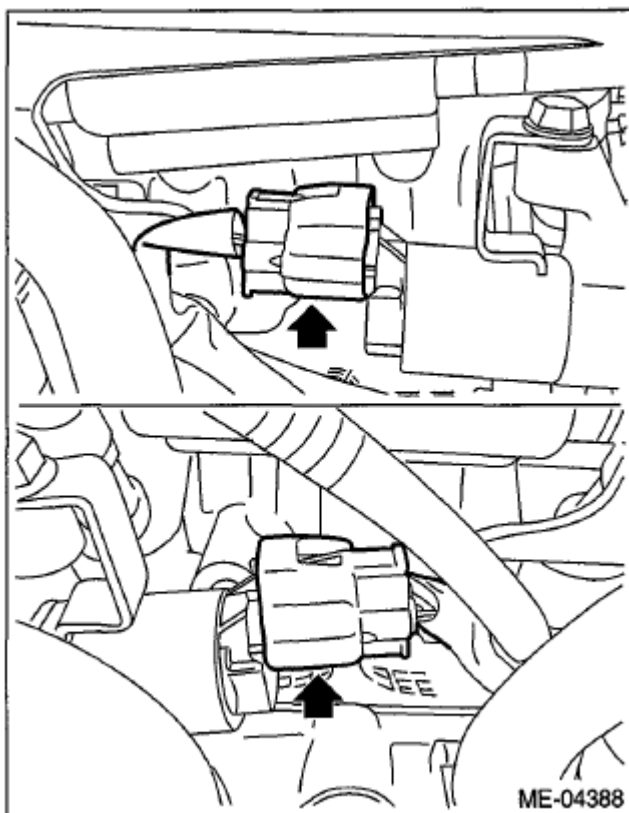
Locating Intake Oil Flow Control Solenoid Valve Connector
